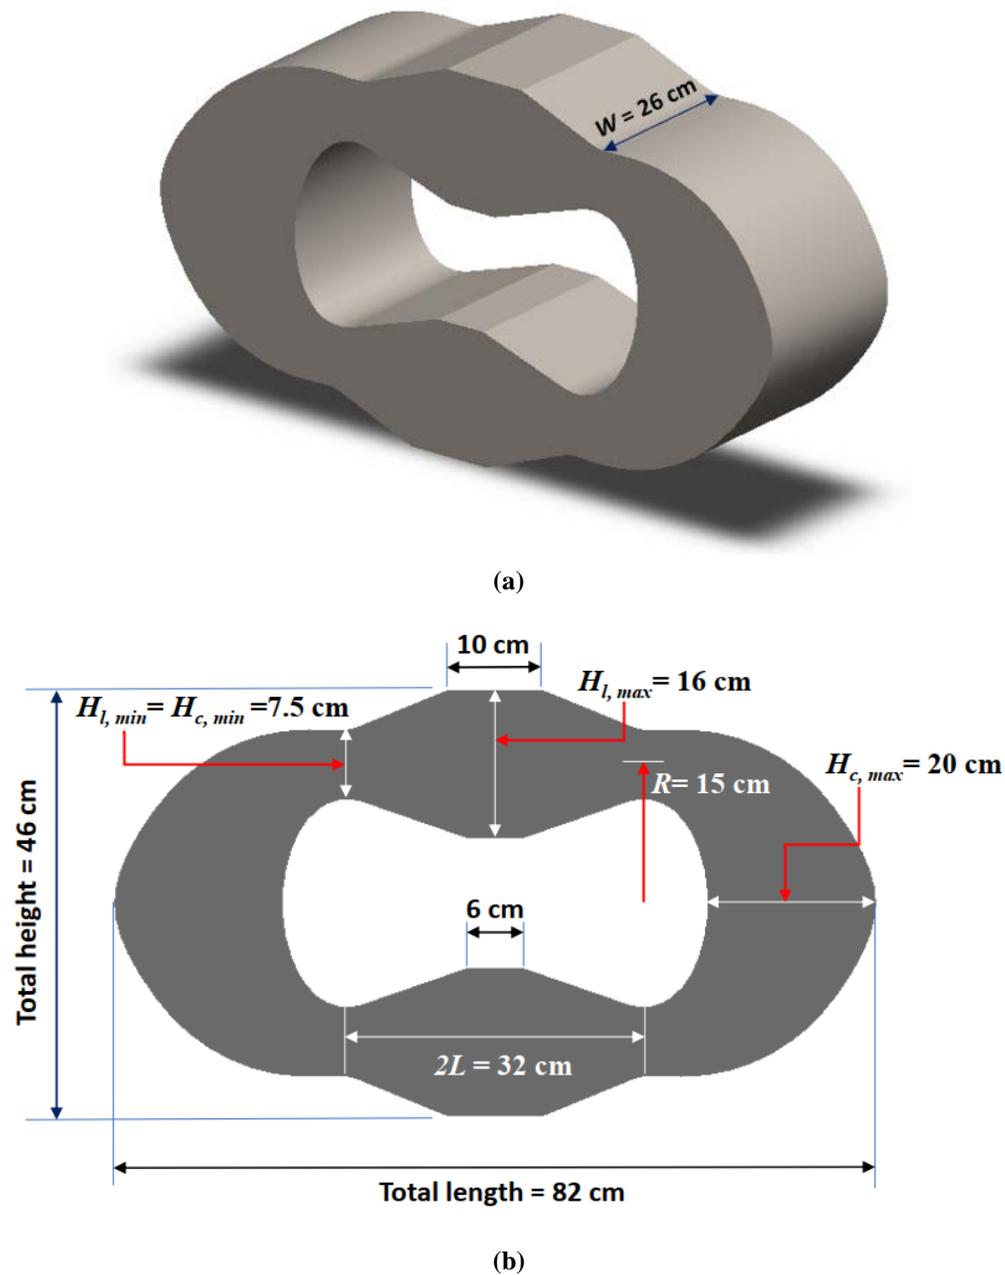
Optimum dimensions of the proving ring using (a) isometric view and (b) front view
